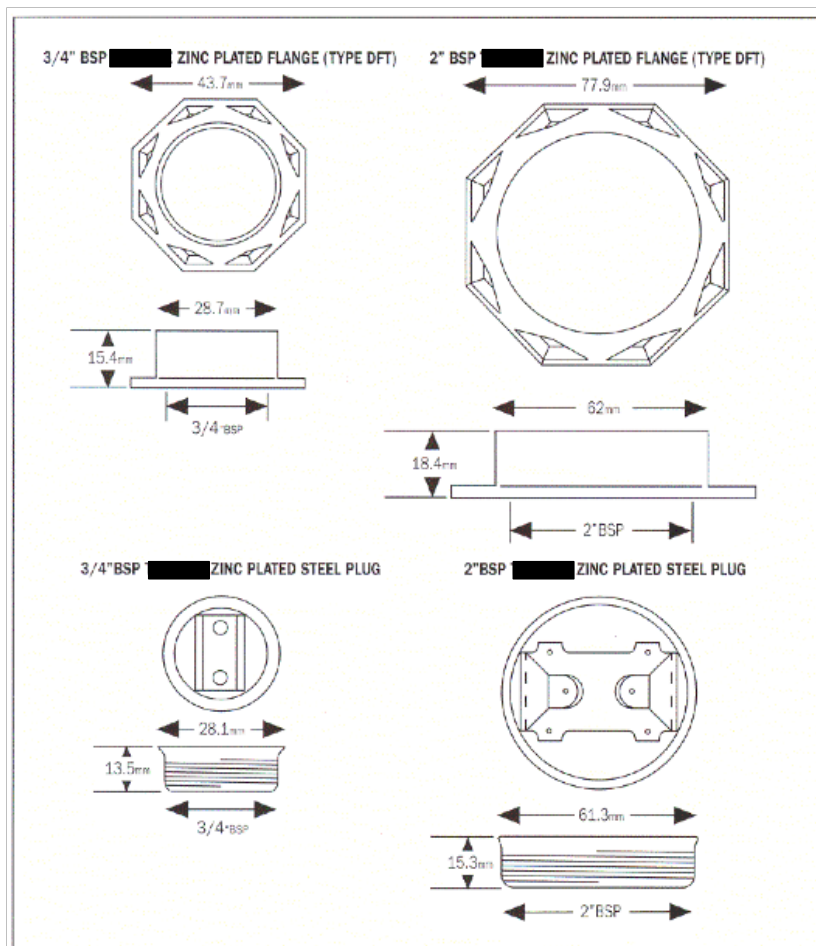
dimensions of G2 & G³/₄ flanges and plugs
